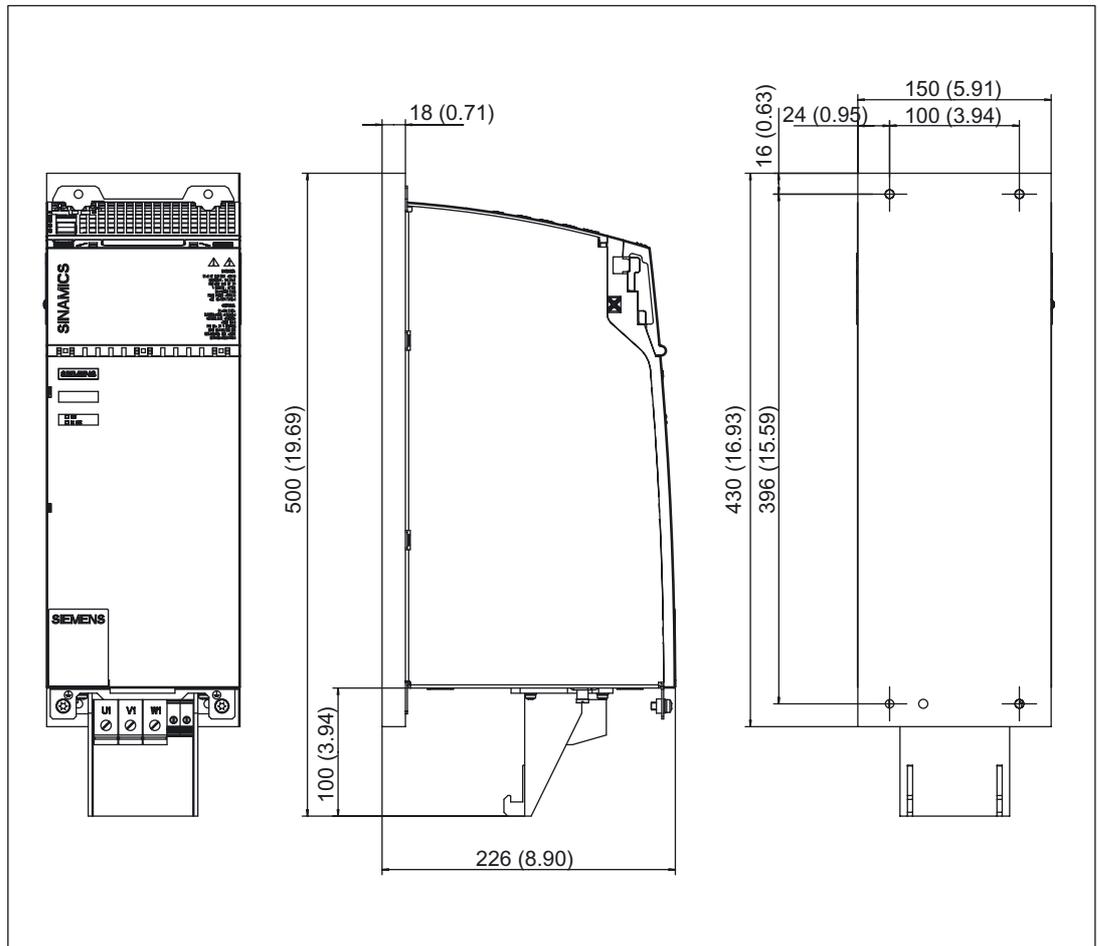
Dimension drawing of Basic Line Module with cold plate (40 kW), all dimensions in mm and (inches)
